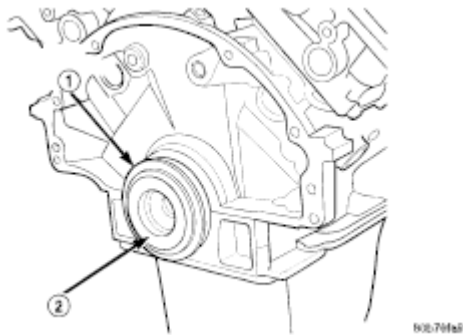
Identifying Magnetic Seal Guide Special Tool 8349-2 And Crankshaft Rear Oil Seal
